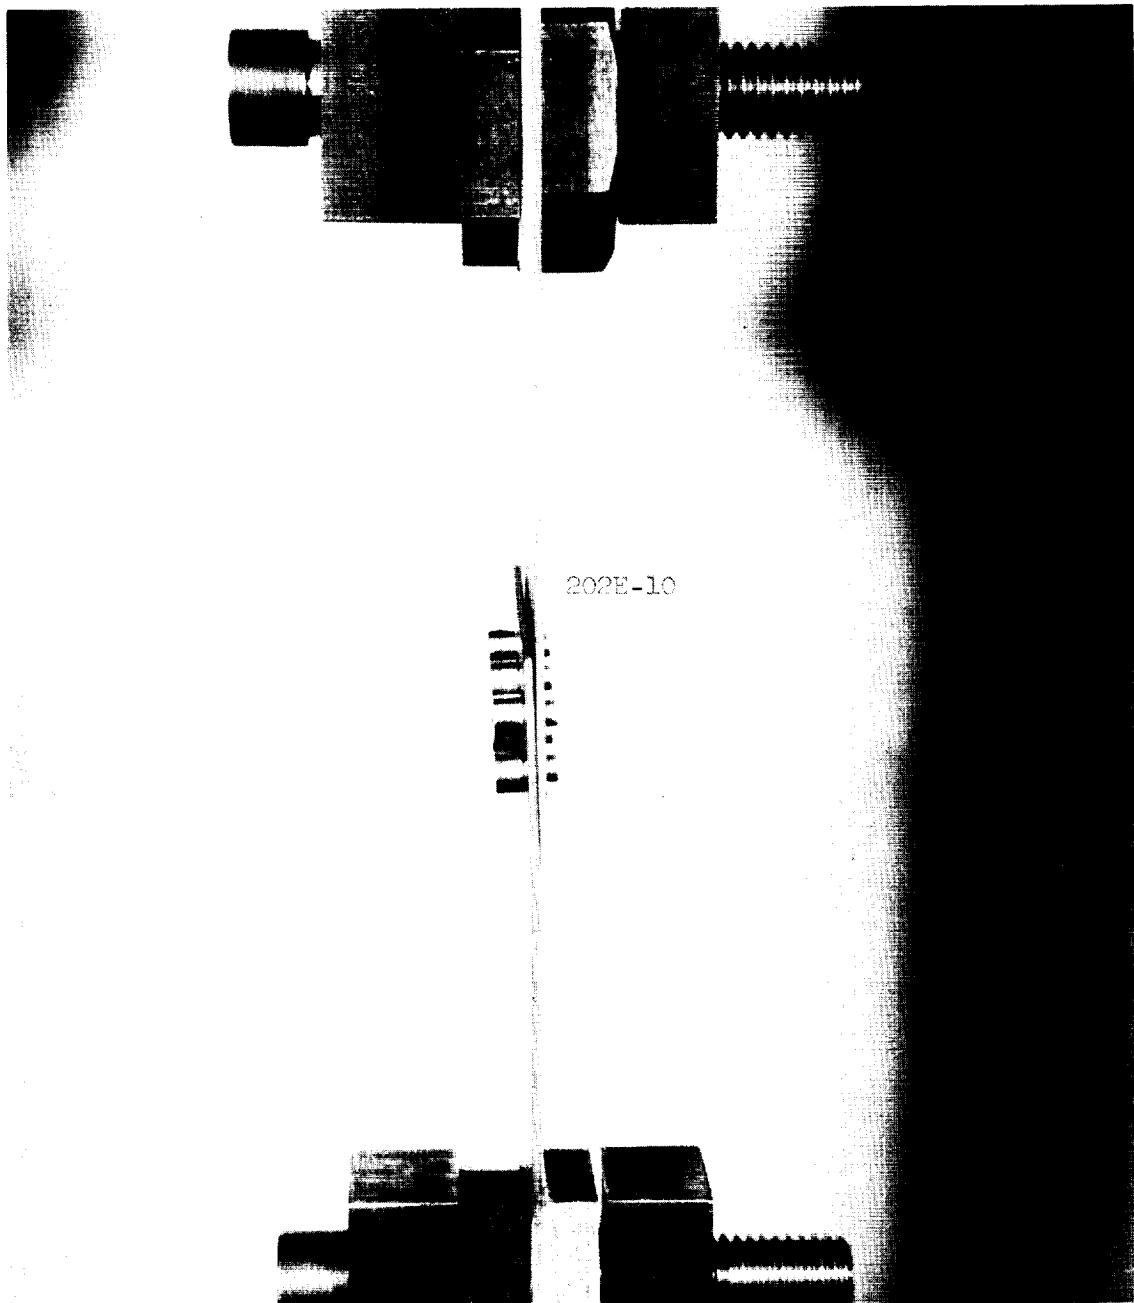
TYPE IIE SPECIMENS - 0.060-INCH MATERIAL - "LOCKALLOY" RIVETS
